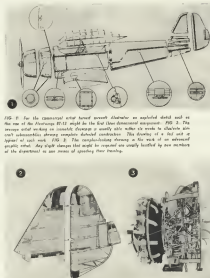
For the conventional setup based aircraft illustration an exploded detail such as the one of the drawings 17-17 might be the first three-dimensional viewpoint. FIG. 2. The reverse approach is working in isometric drawings a usually side view which is directly into the illustration through complete detailed construction. The drawing of a fuselage and its support of each work. FIG. 3. The construction drawing in the work of an industrial graphic artist. Any slight changes that might be required are usually handled by new members of the department in new series of applying their training.
